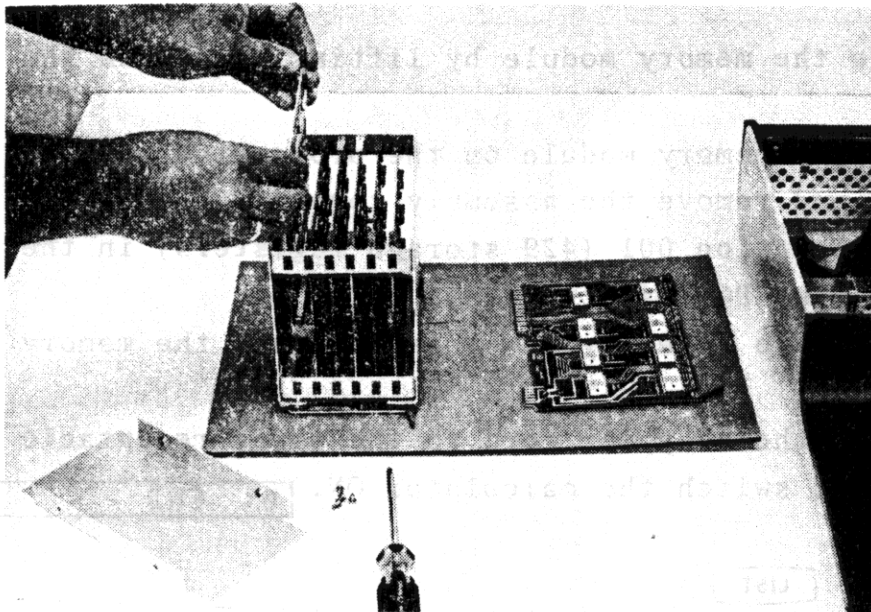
Exchanging PC Boards in the Memory Assembly
